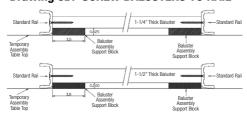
A: TEMPORARY ASSEMBLY STATION SETUP
